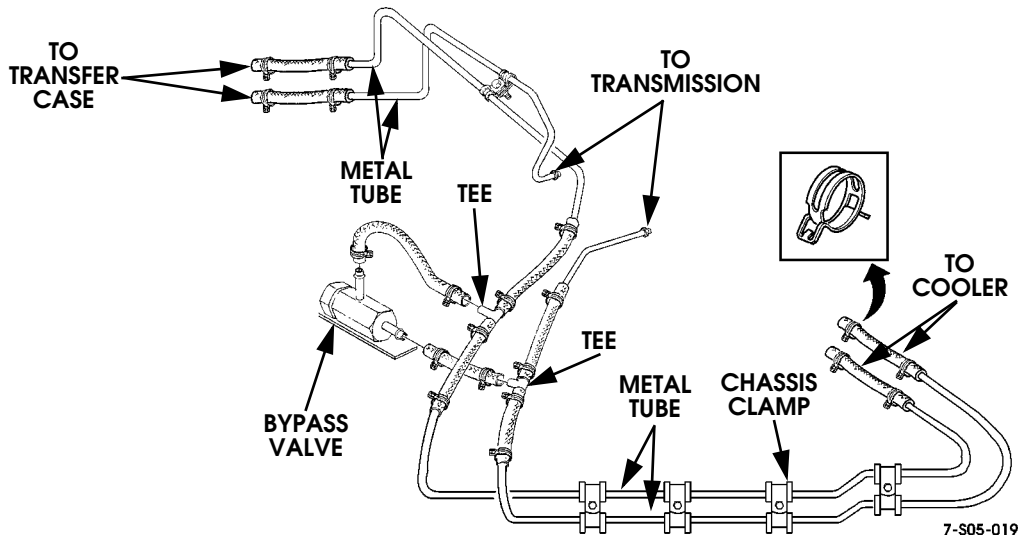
Transmission/Transfer Case Oil Cooler Line Connection
